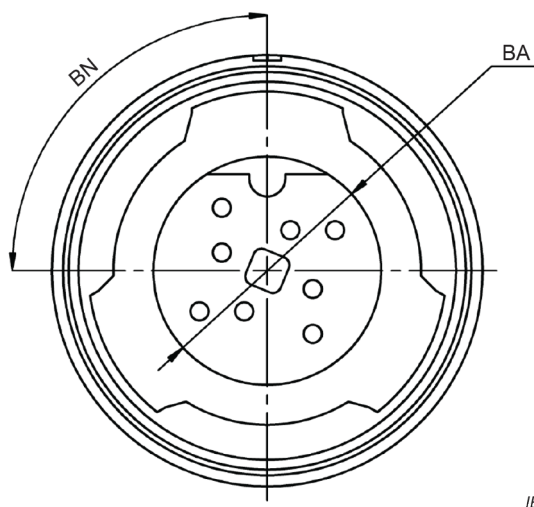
Front view of the female side of the push-pull housing for H-coding
